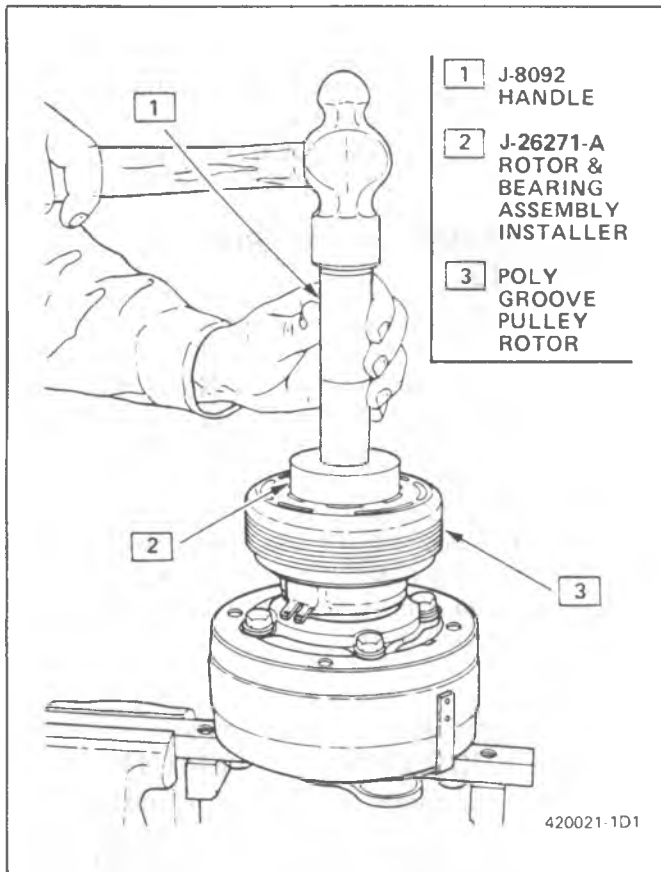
D1-21 Installing Rotor & Bearing Assembly, Poly-Groove Type (On)
